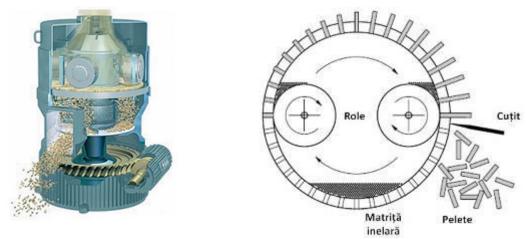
Operating principle of pellet mills (left – flat die; right – ring die) [2]
